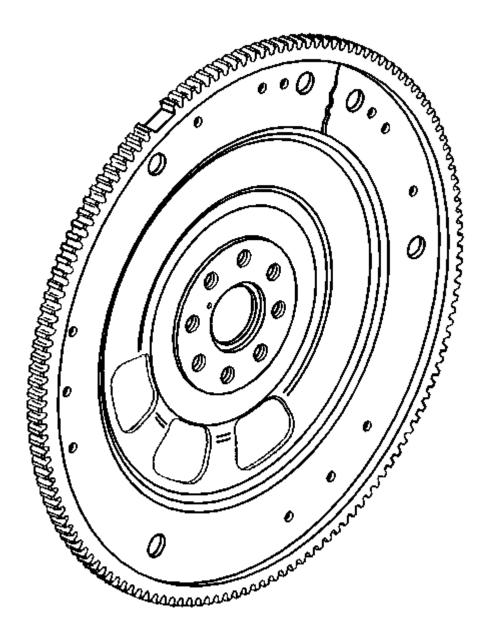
Inspecting Engine Flywheel Courtesy of GENERAL MOTORS CORP.
